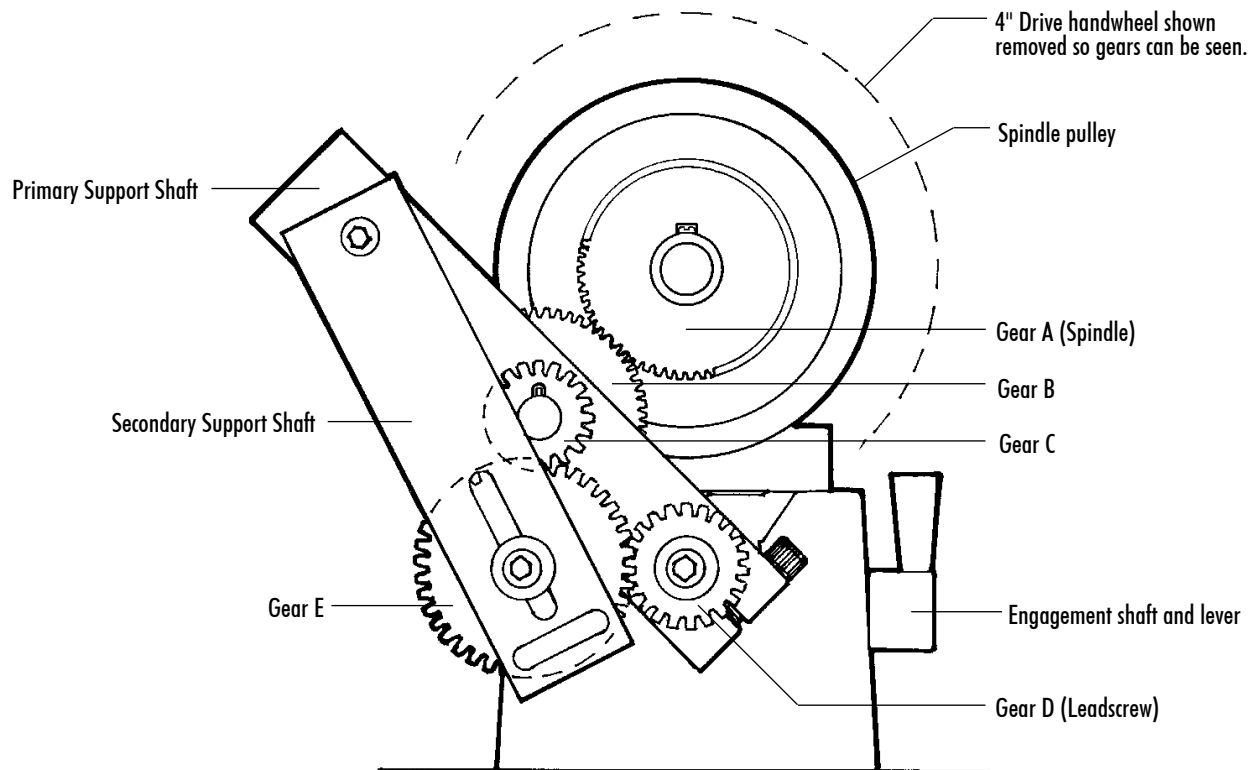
Gears A, B, C, D and E installed for cutting a right-hand thread
